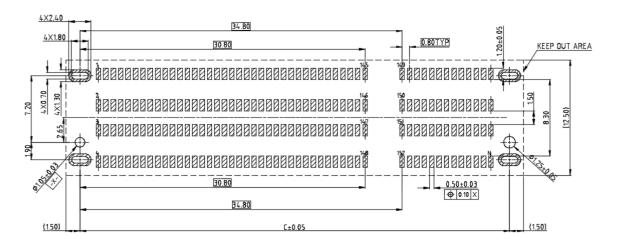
GENERAL PCB LAYOUT FOR MOTHER BOARD (YOUR CONFIGURATION MAY VARY)
